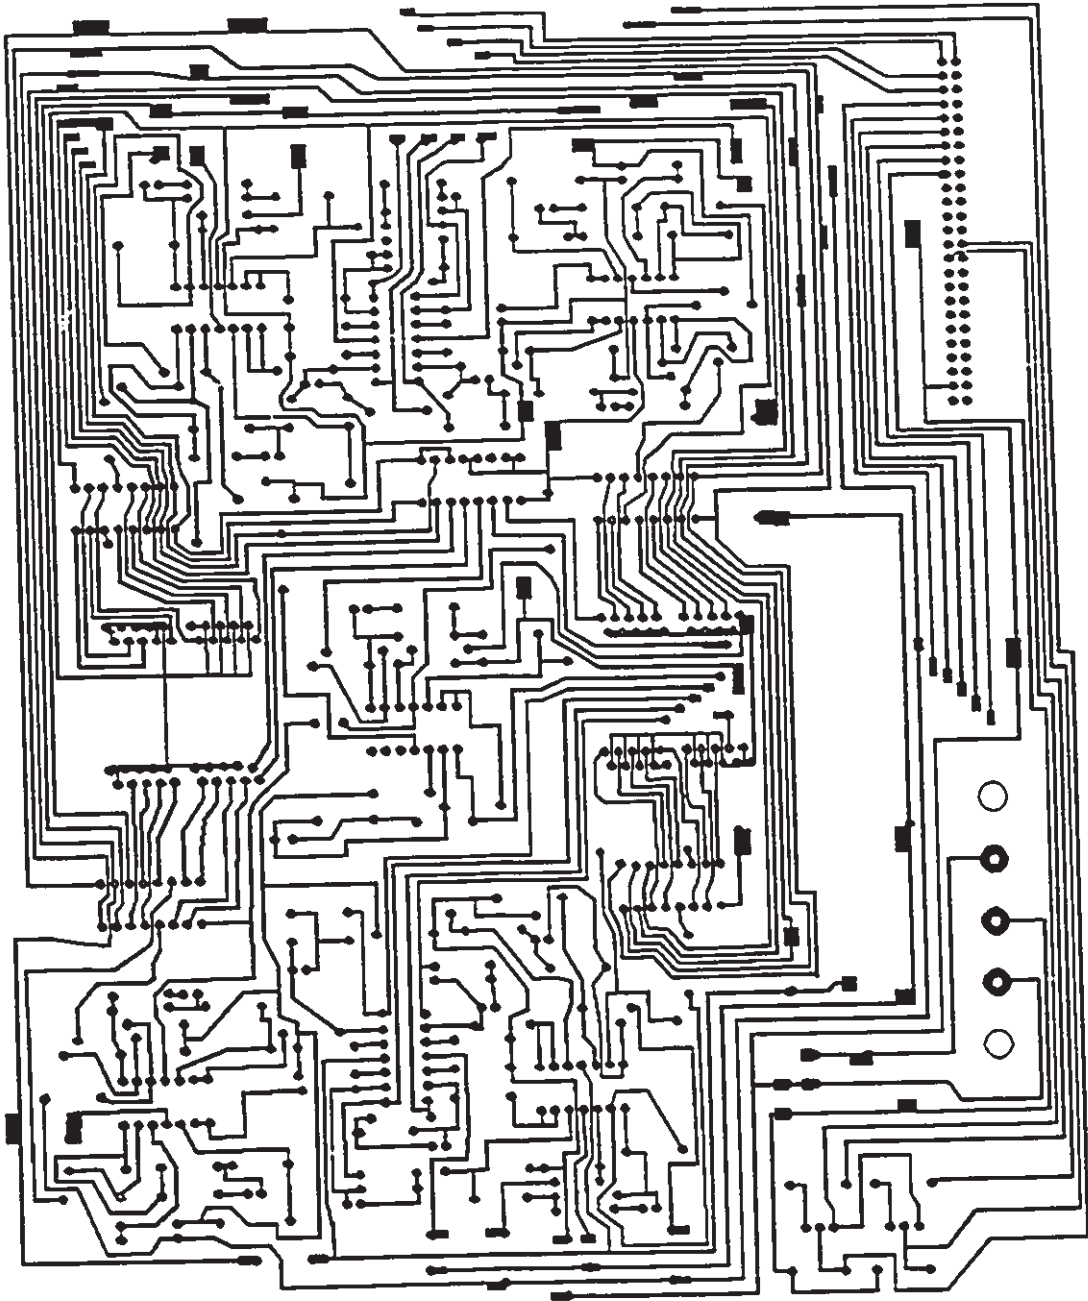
Layout drawing of the printed circuit board for the signal conditioning hardware.
